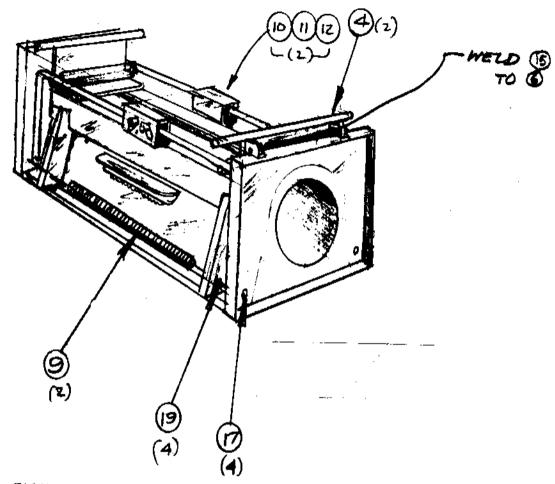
ATTACH DOORS WITH HINGEPIN (15), WELD IN PLACE, AND PUT SPRINGS (9), CONNECTORS (19), AND ATTACHMENTS (17) IN PLACE. UNIT IS NOW COMPLETE EXCEPT FOR PARTS 10, II AND 12, WHICH NOW CAN BE INSTALLED.
